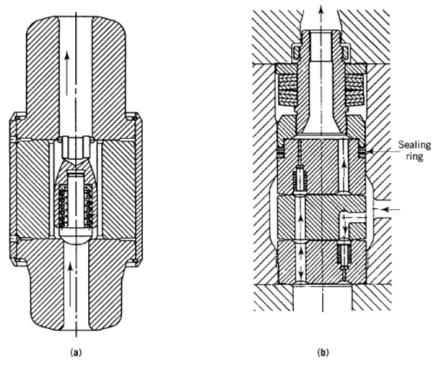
(a) Single poppet valve; (b) combined inlet-outlet axial plate valve. (Courtesy of Dresser Rand (169).)
